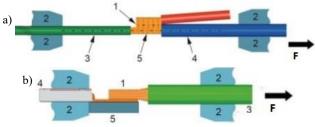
Schematic test setup for pull-out force test (1 - splice, 2 fixations, 3 - wire type 2, 4 - wire type 2, 5 - tensile axis): a) pull-out force test for splice; b) pull-out force test for connection between wire and metal terminal (1 - weld package, 2 - fixations, 3 - wire, 4 - metal terminal, 5 - terminal support).
